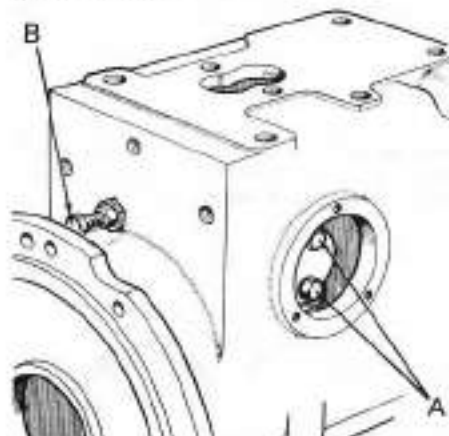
To remove control valve assembly, unbolt pressure line at (A) and unscrew lubrication line retaining set screw (B) 9 turns.
